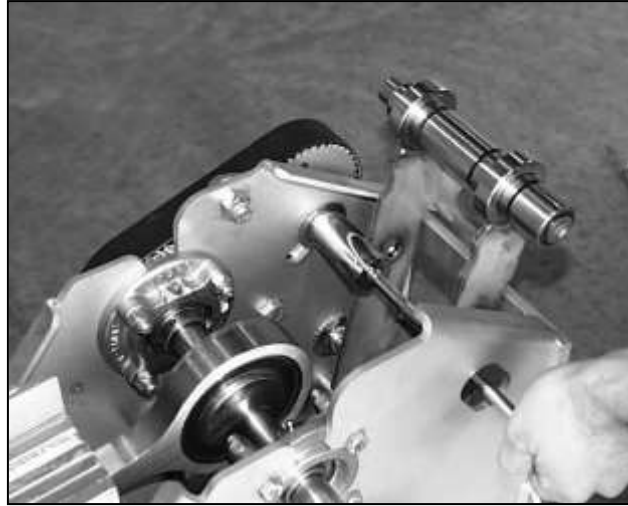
Tightening the Tensioner Sprocket Jam Nut
